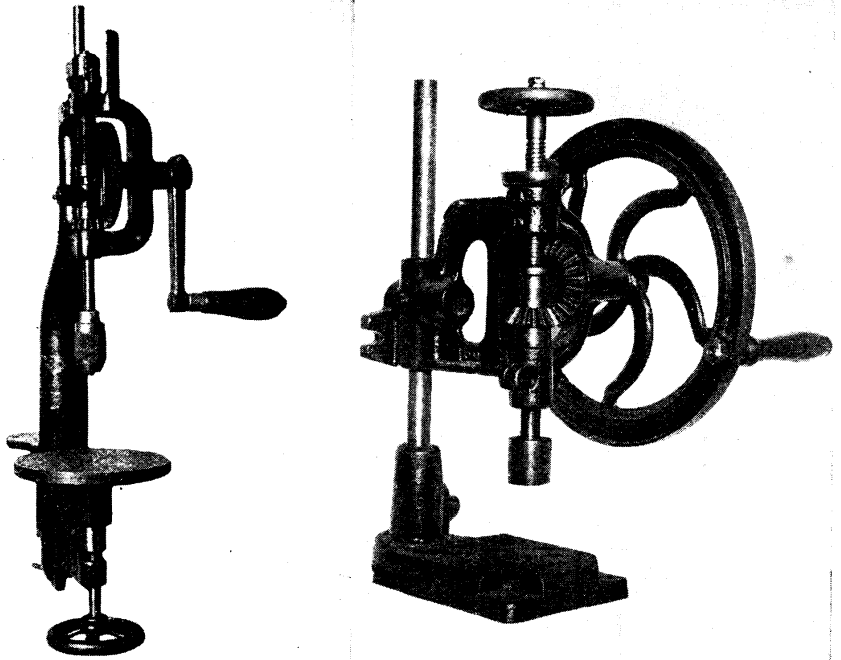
Work may be carried out with a light pattern hand-power bench drilling machine which would be very difficult with a hand drill. In this pattern the feed is automatic. Fig. 13. Drilling of a heavier nature can be accomplished with this sturdy bench drilling machine
